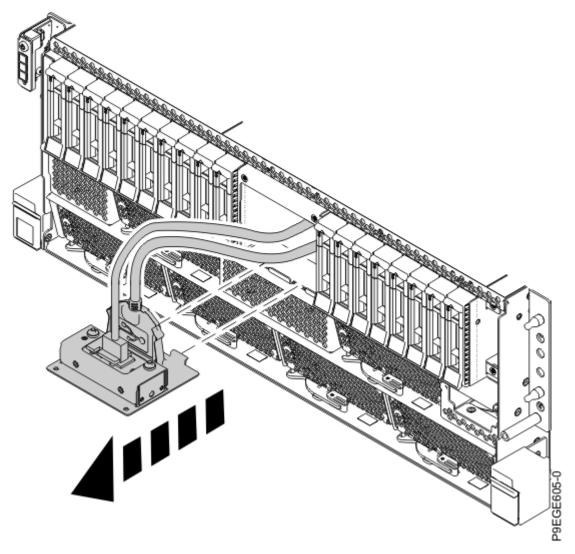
Removing the control panel display housing and cable for a rack-mounted system
